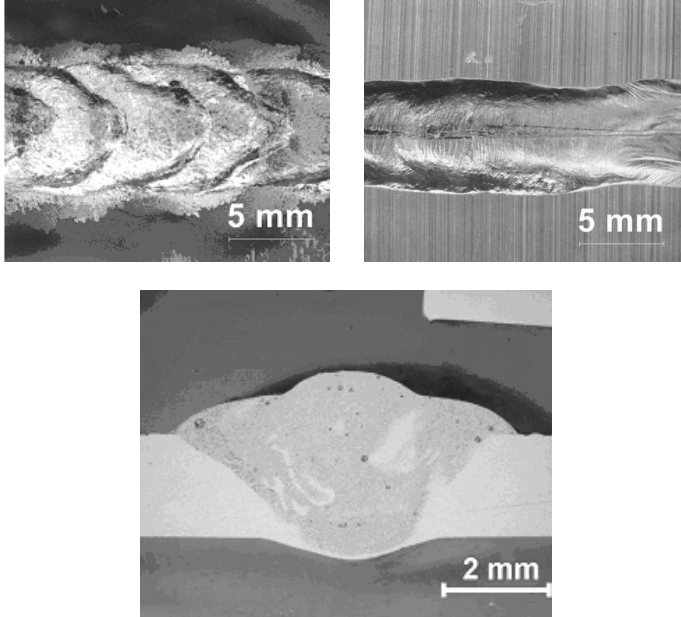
GMAW top and bottom photograph of seam surface and cross-section macrograph; small hydrogen pores visible in the cross-section, bead on plate; EN AW-6060 (AlMgSi0.5) T66; filler Al4047 A (SG-AlSi12); $\varnothing_f = 1 \text{ mm}$; torch distance $s = 22 \text{ mm}$; torch inclination angle $\alpha = 20^\circ$; argon flow 8 L min^{-1} ; $v_w = 0.5 \text{ m min}^{-1}$; $v_f = 4.7 \text{ m min}^{-1}$; $I_s = 80 \text{ A}$; $I_{abs} = 95\%$
